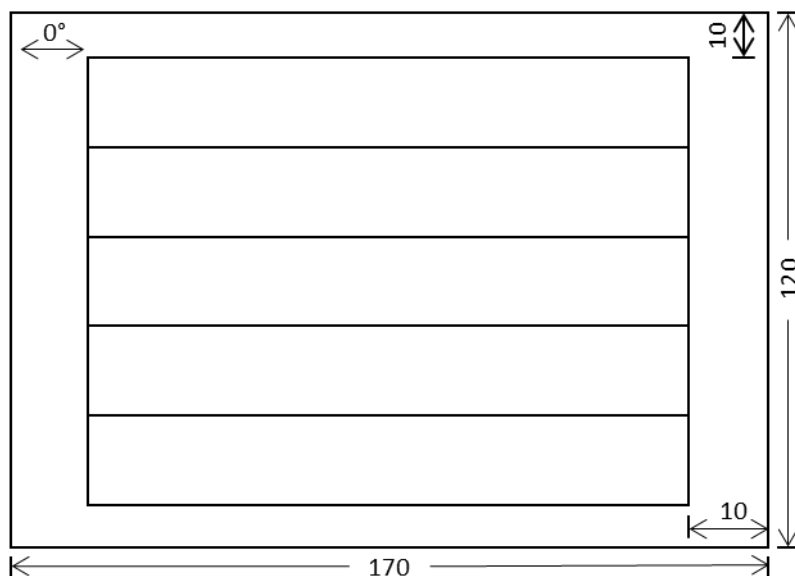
Positioning of the coupons on the test panels for in-plane shear strength test. All dimensions are expressed in mm.
